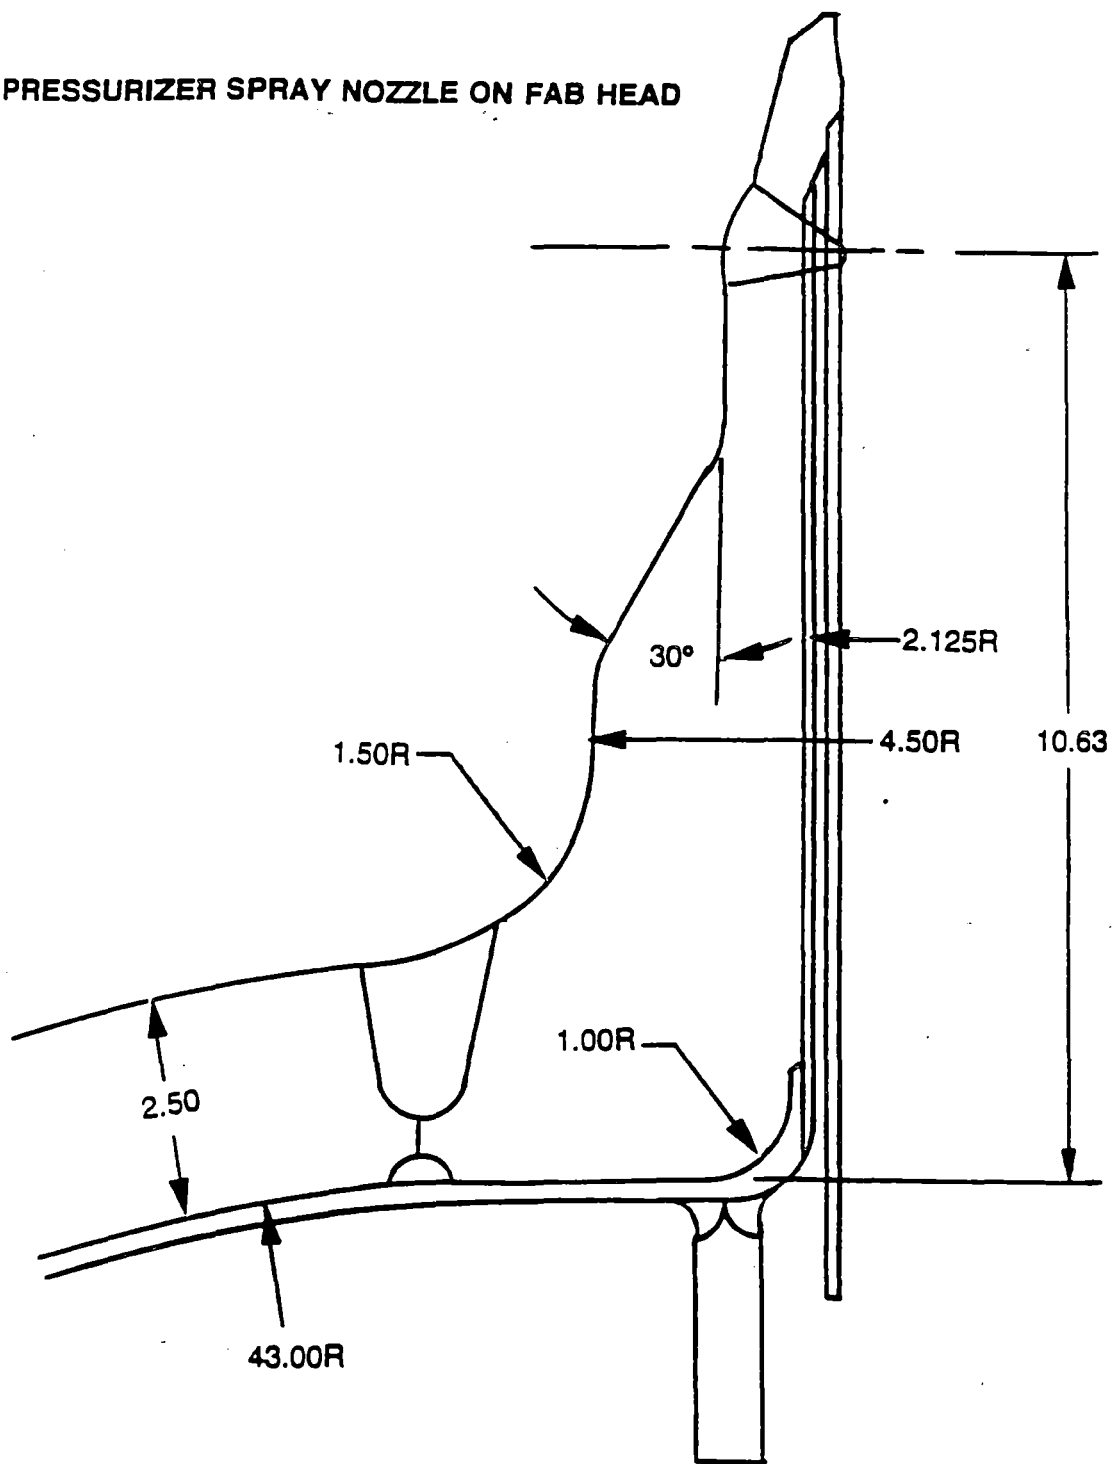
Geometry of a Typical Pressurizer Spray Nozzle - Fabricated Head.
